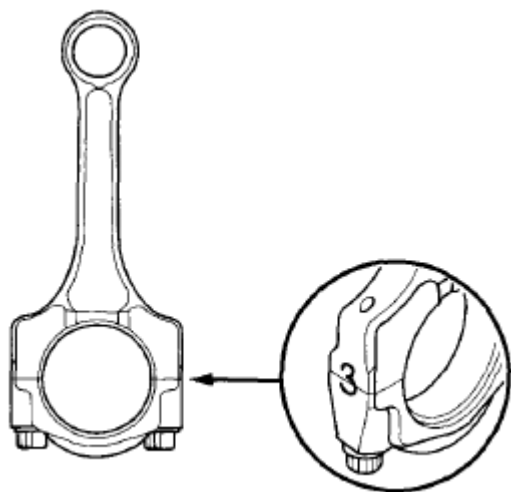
Identifying Connecting Rod Big End Bore Code Locations
